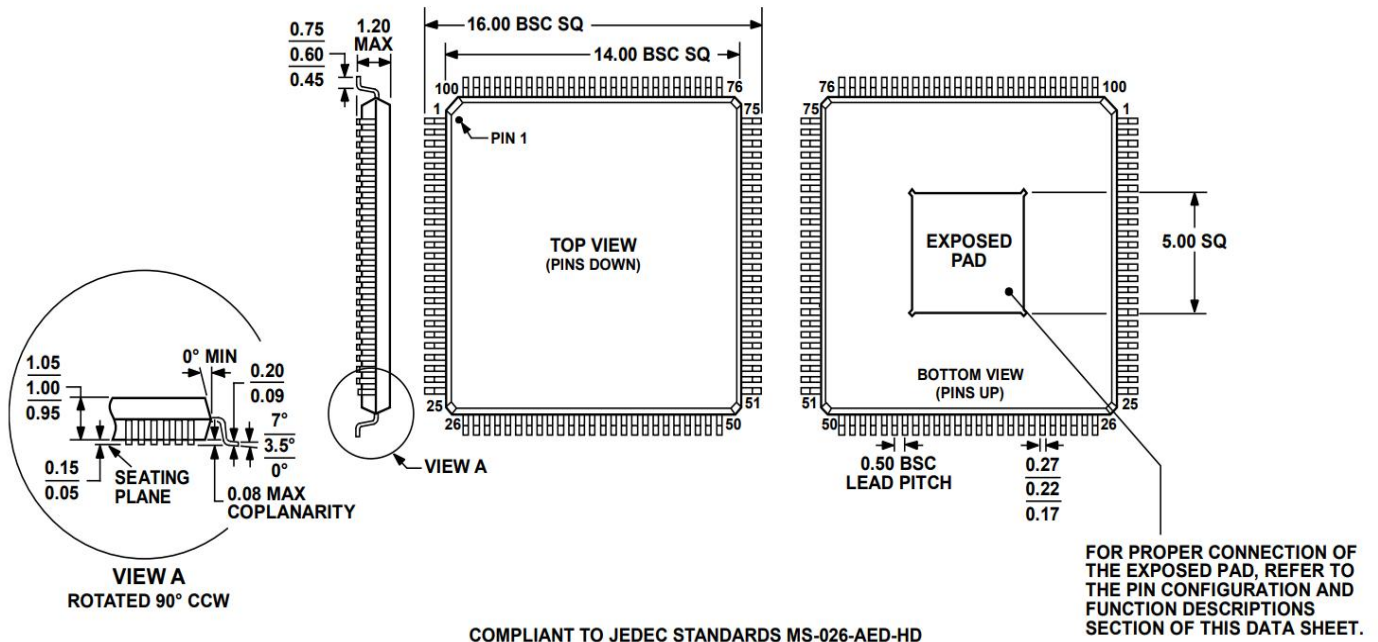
100-Lead Thin Quad Flat Package, Exposed Pad [TQFP_EP]
